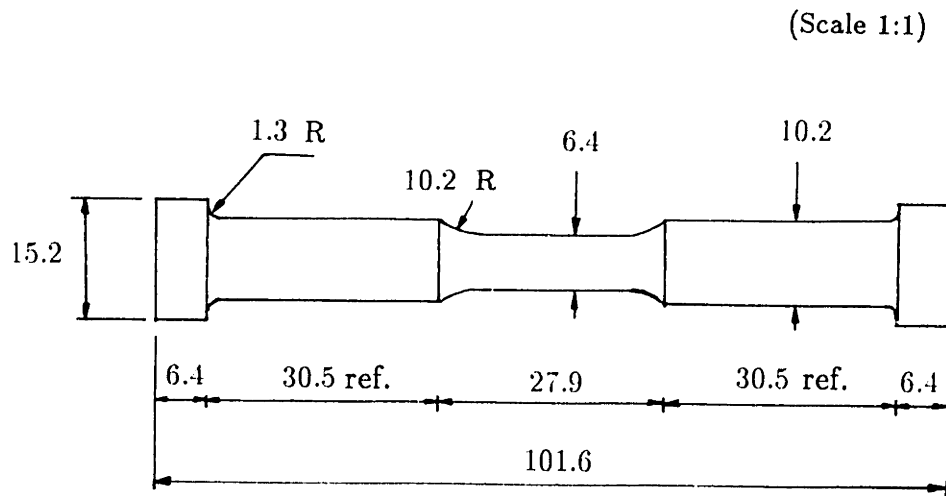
Detailed drawing of uniaxial specimen with button-head ends
